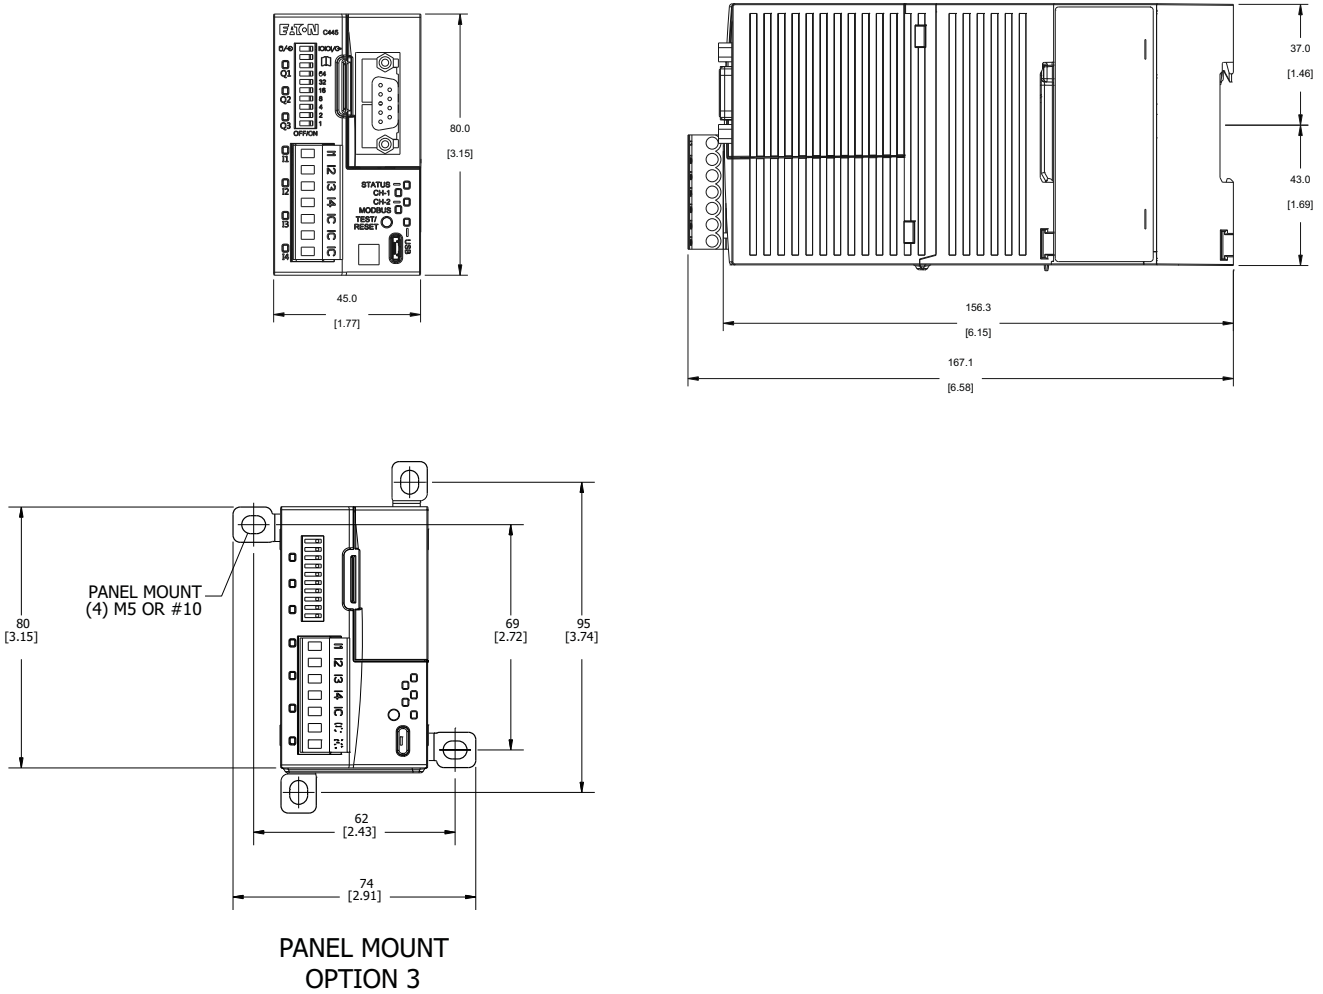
Measurement Module—C445MA... Mounting Dimensions
